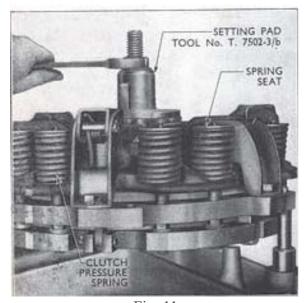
Clutch Assembled - Depressing Release Levers to Insert Setting Blocks
